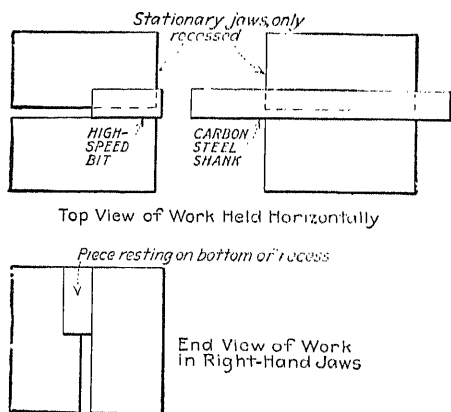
Jaws Used for Stellite Butt Welding.
